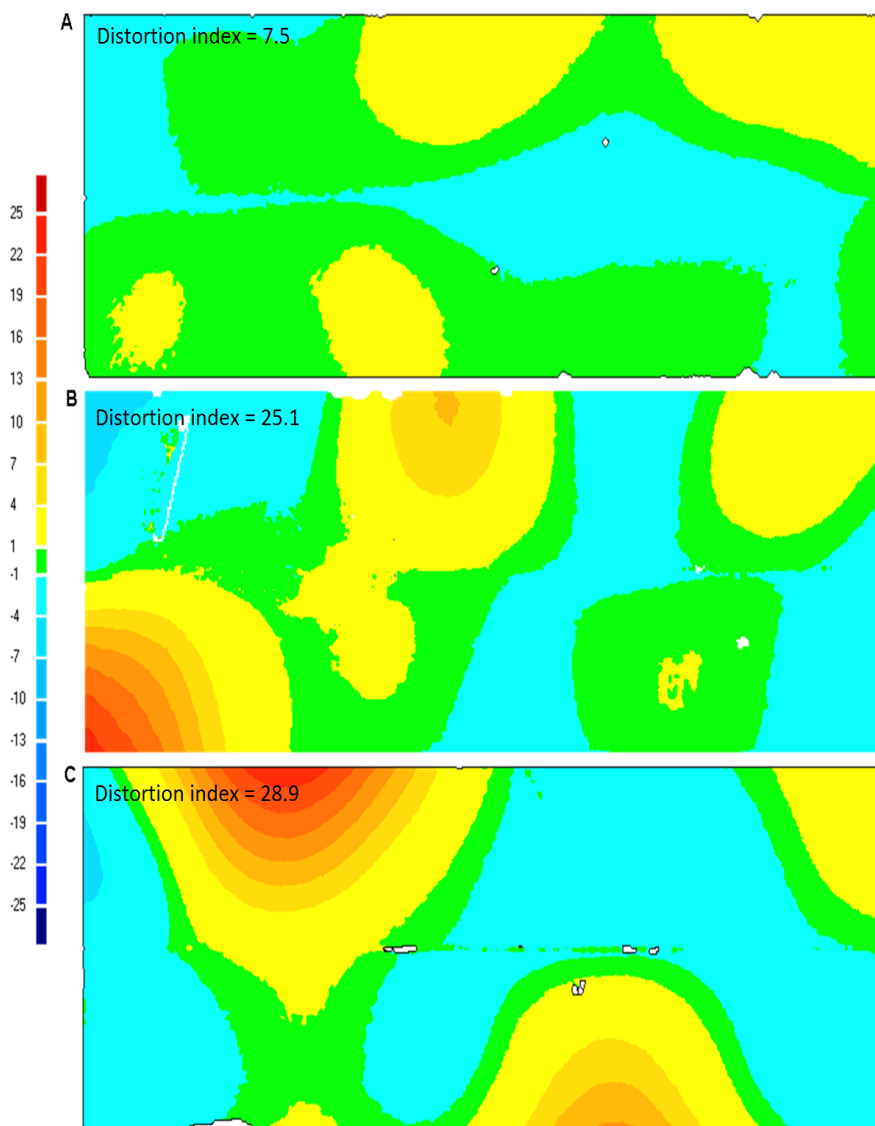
The out-of-plane deformation of AH36 plate for conventional welding in test 4: (a) the initial deformation after tack welds, (b) the out-of-plane deformation after conventional welding of the first pass and (c) the final out-of-plane deformation after conventional welding of the second pass. The scale is -25 mm to +25mm.
